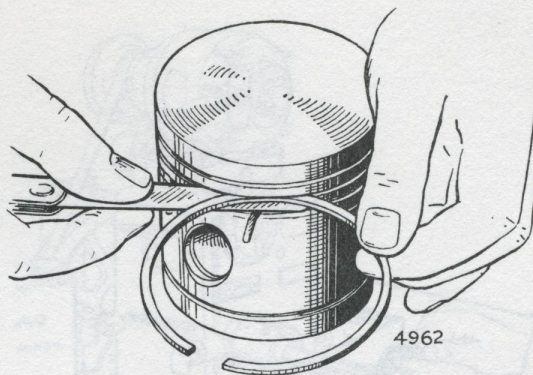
Checking piston ring side clearance (1494 c.c. piston shown)
